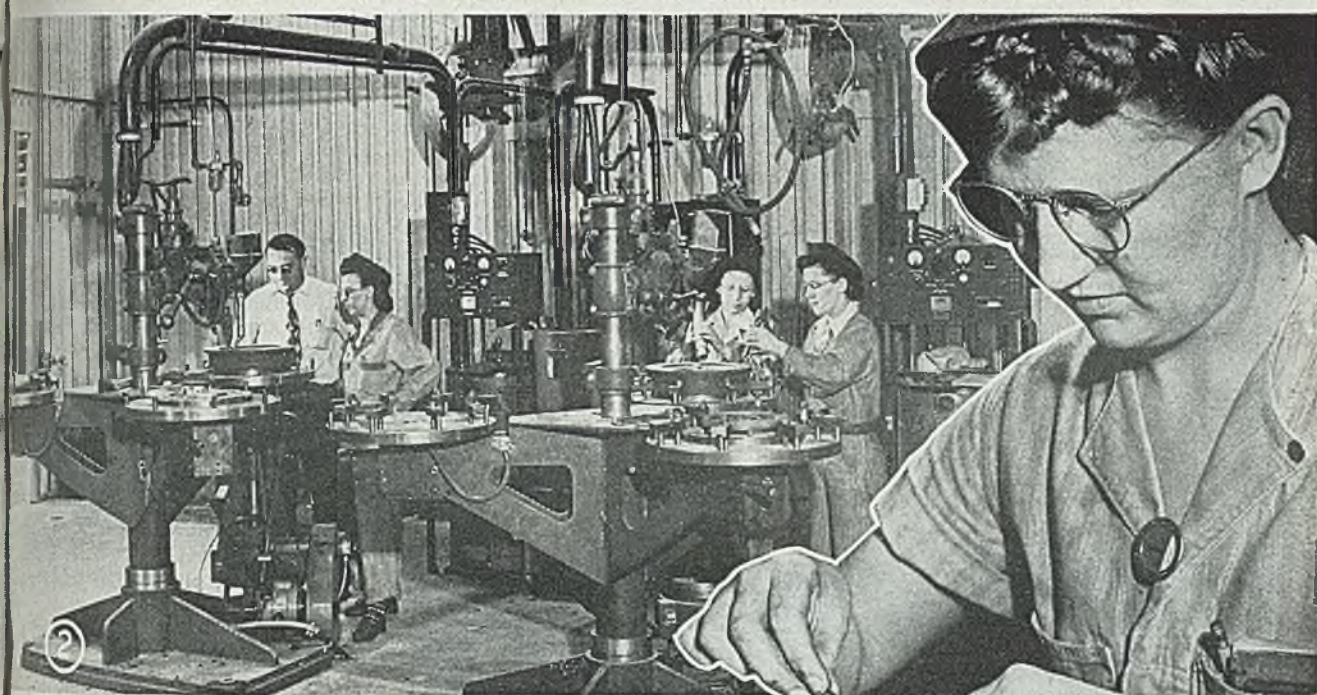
Pair of automatic welding machines: Right hand unit welds first side; second unit completes weld on other side. Both machines move work progressively under the automatic welding head
